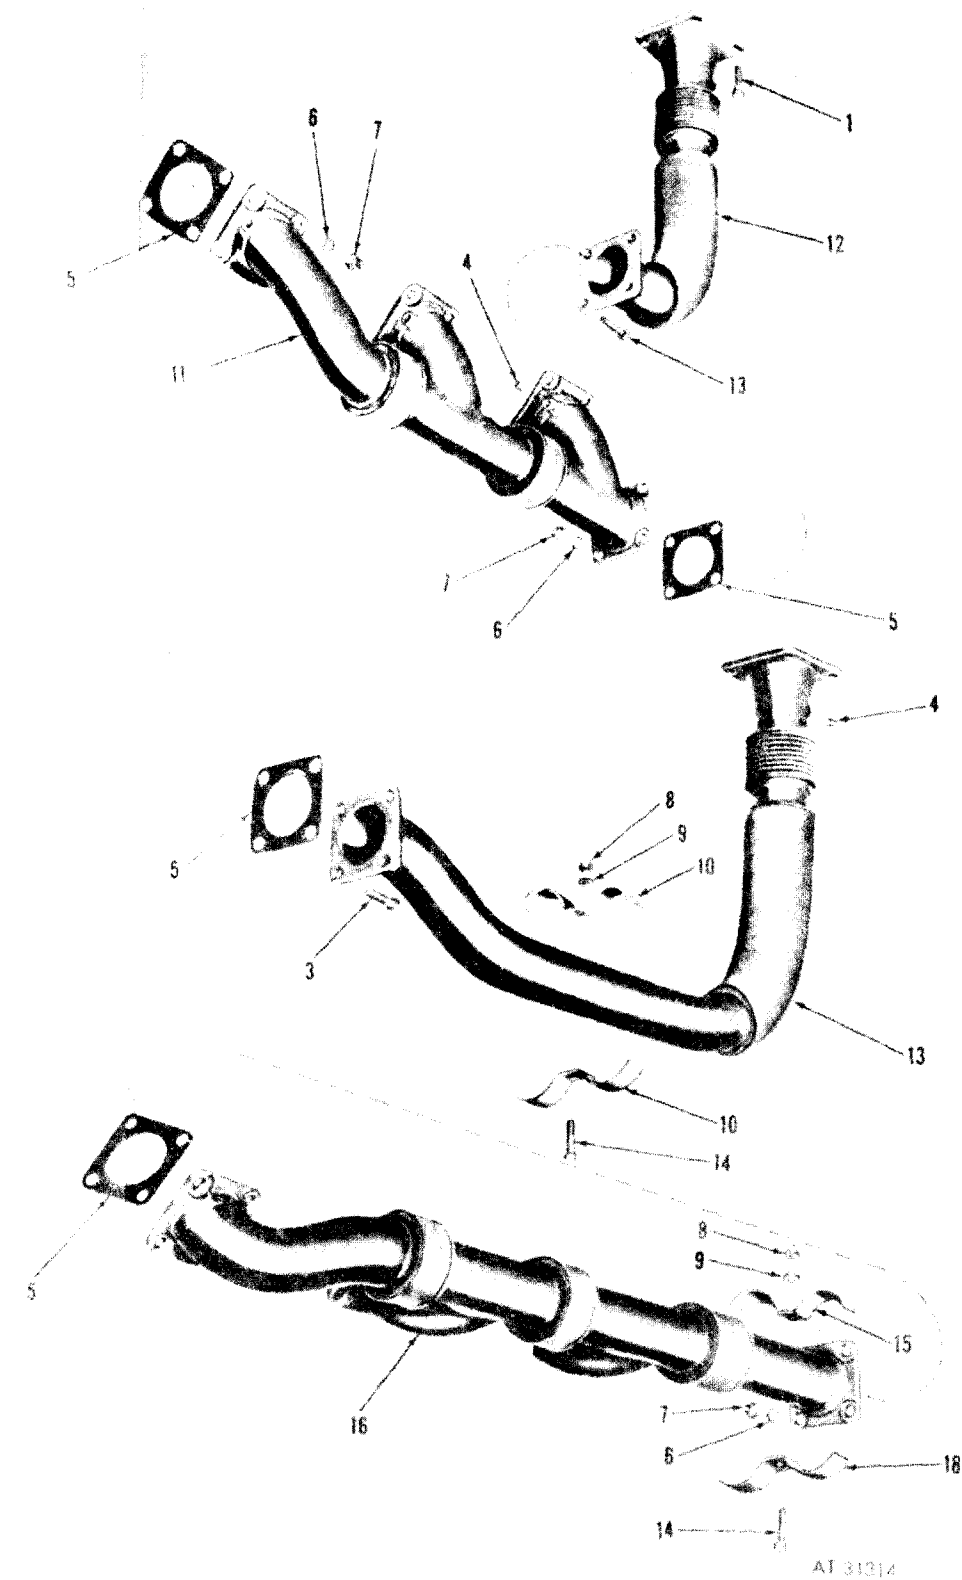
Exhaust Manifolds and Associated Parts—Exploded View.
